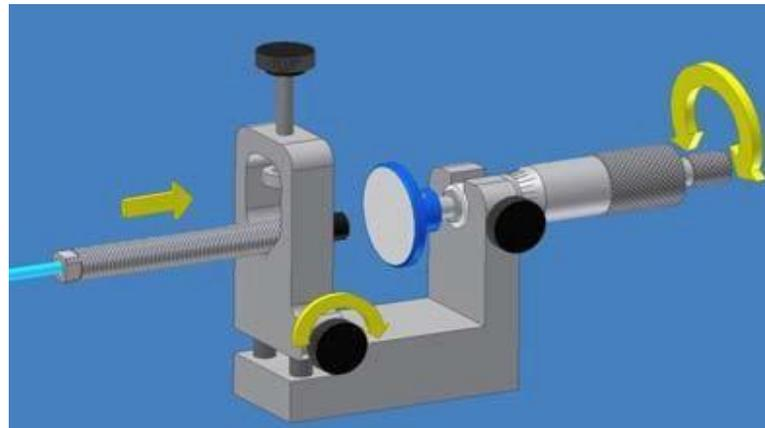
Slide the probe through V Probe Mount until the Probe and Target faces are flush.
